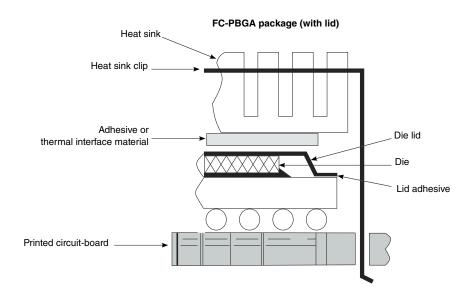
Package exploded, cross-sectional view-FC-PBGA (with lid) - Rev 1.1
